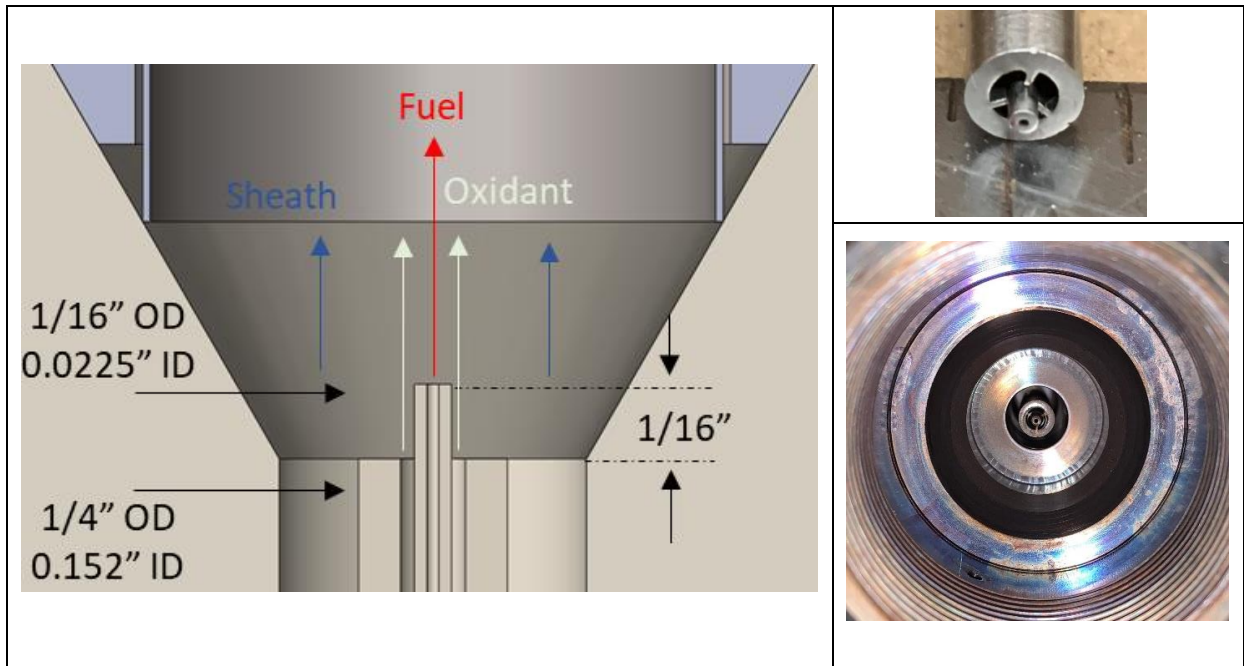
Nozzle configuration. Left: 3D model of nozzle located within the Inconel 625 adapter shown further in Figure 8. Middle: Nozzle close up showing Inconel 625 strips fuse-welded to the outer oxidant tubing to allow for disassembly if needed. Right: Nozzle centered within Inconel 625 adapter as modeled in the image to the left.
